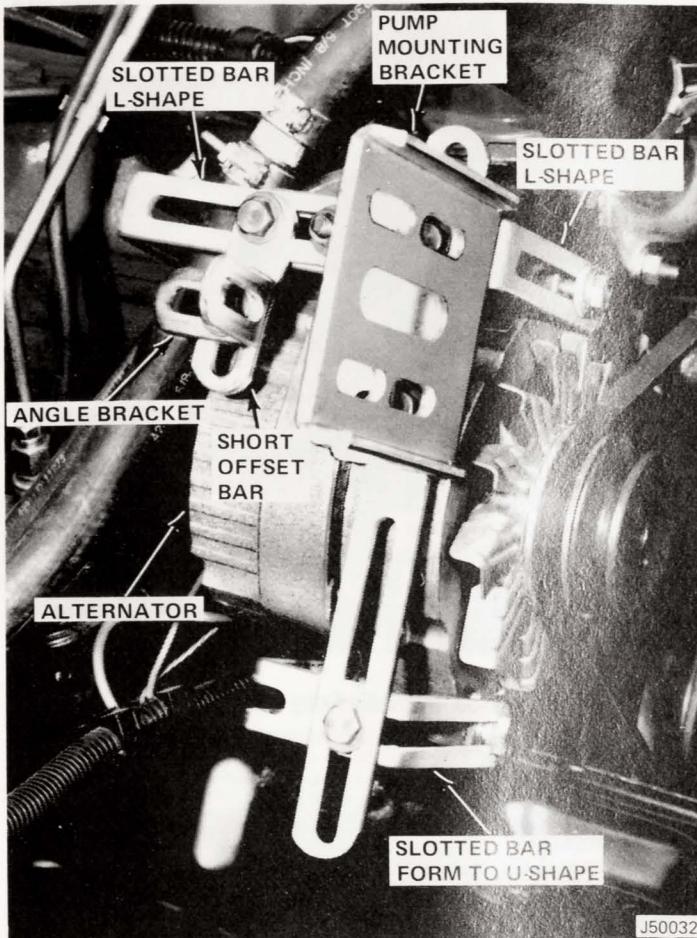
Pump Support Bracket Installation—Six Cylinder
